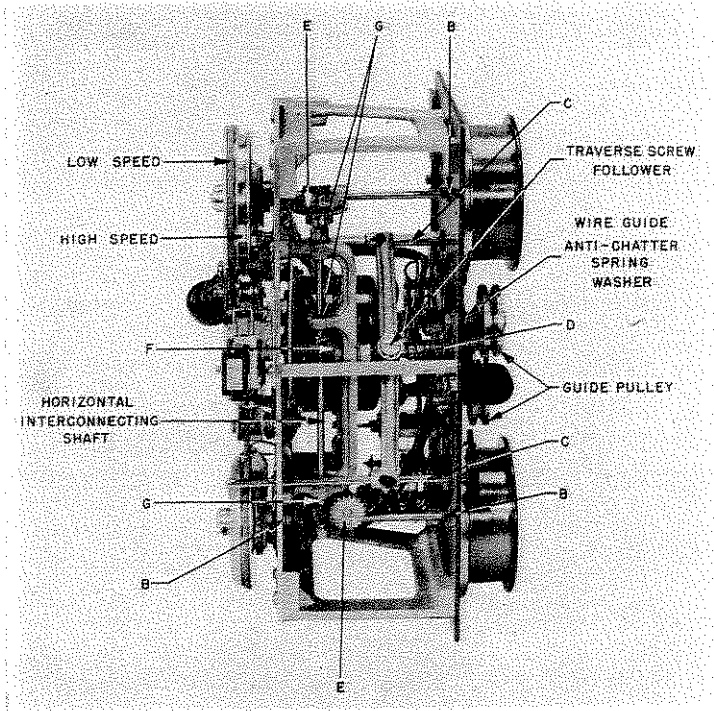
Top and Bottom Views, Showing Mechanical Mechanism
